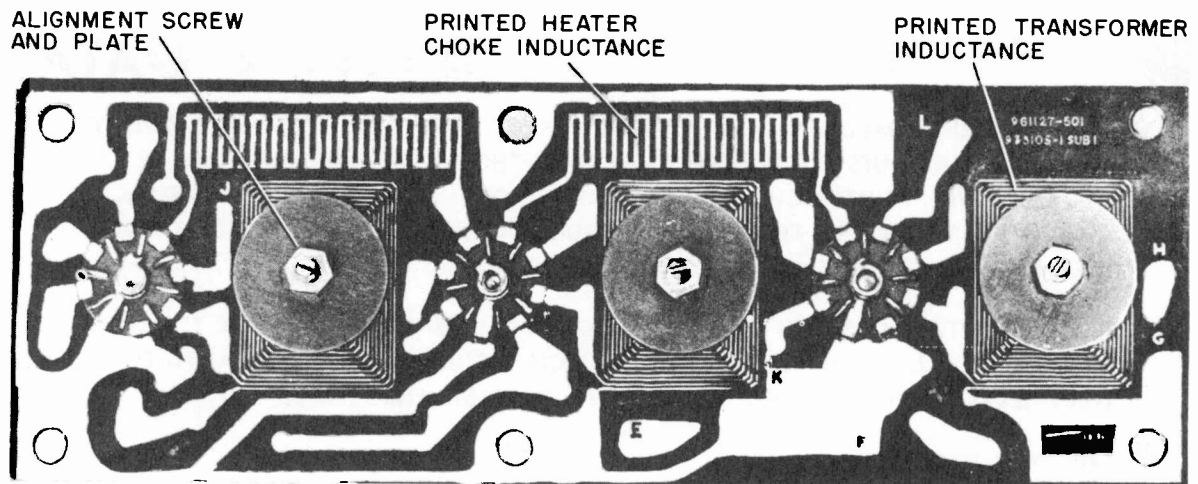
Printed Circuit Side of Typical I-F Printed Circuit Board Employed in RCA Television Receivers
